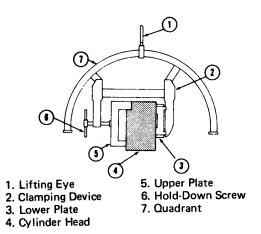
D-4. Cylinder Head Installed in the ST-1012 Hydrostatic Tester
